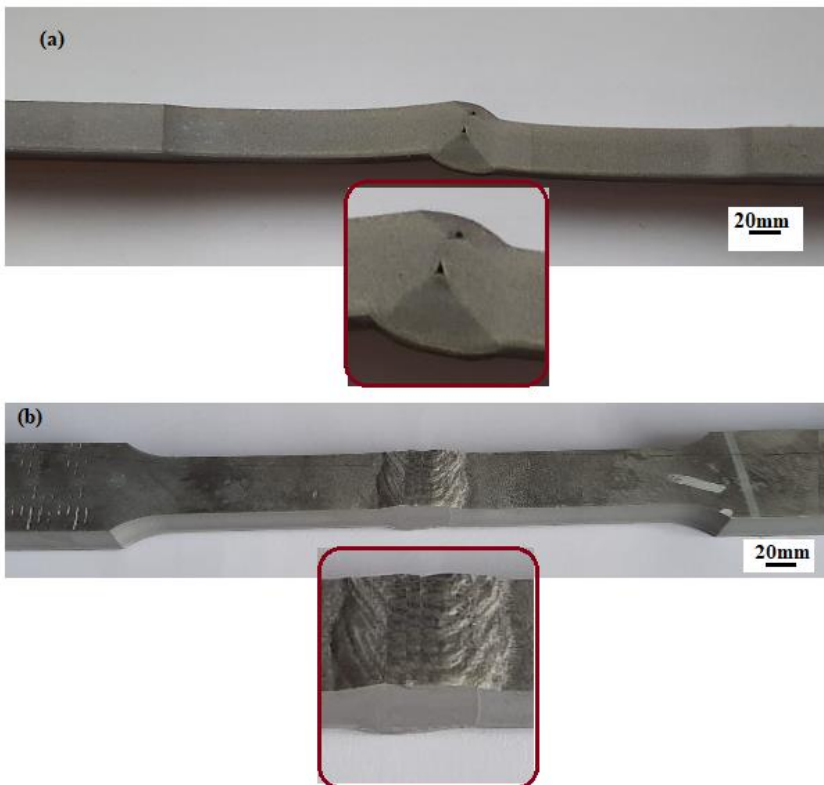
Macro images of welded samples (a) TIG welding (b) MIG welding
